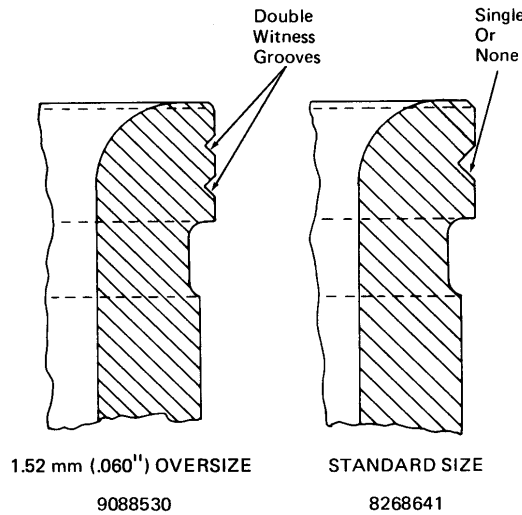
Identifying Grooves, Oversize And Standard Lower Liner Inserts
